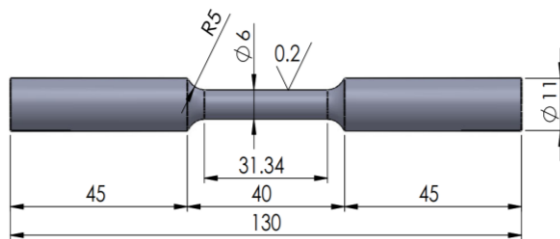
The shape and size of the tensile test specimen (ASTM B557-02a)
